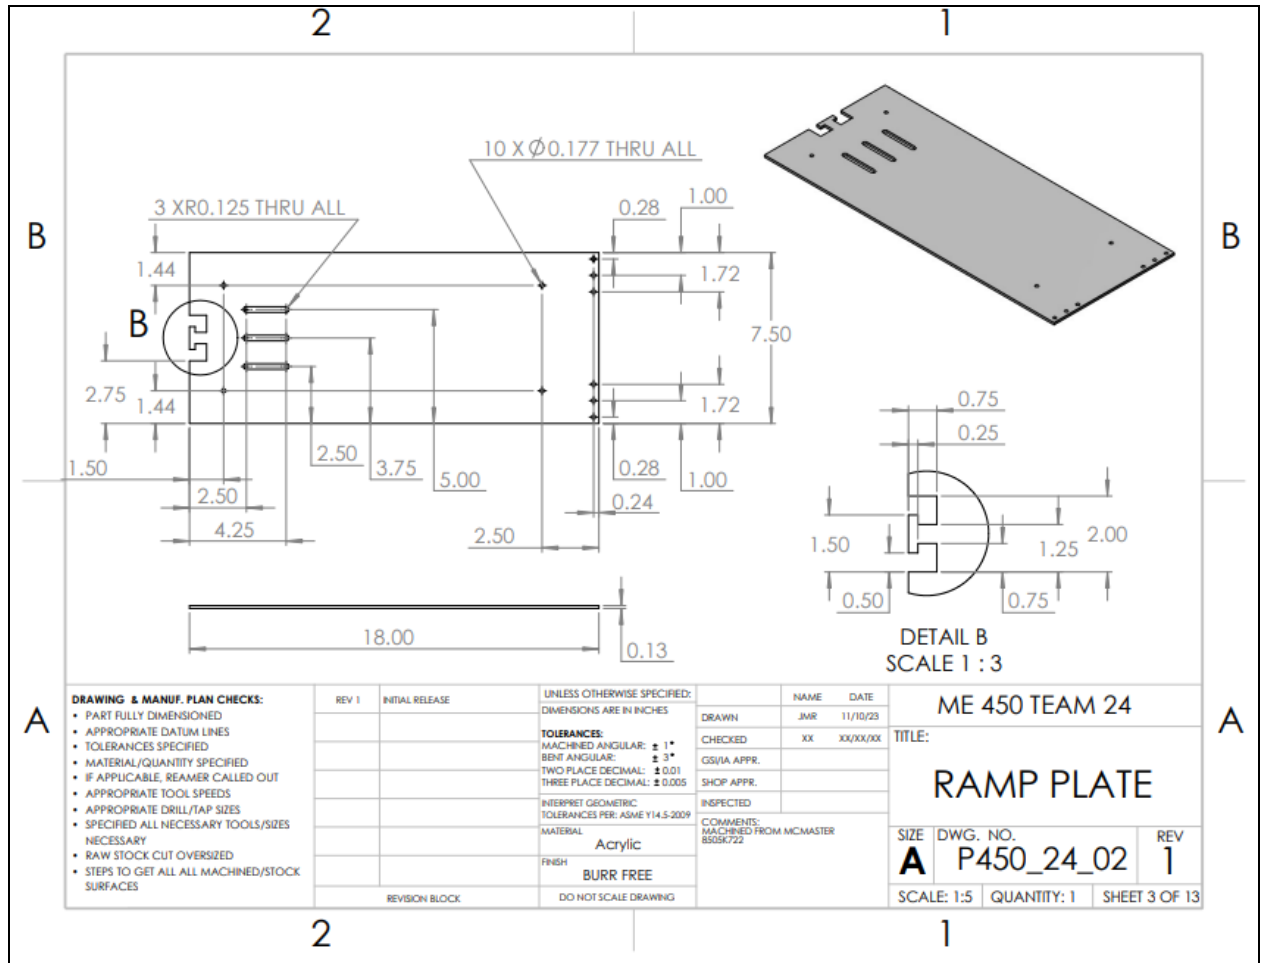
Manufacturing drawing for the ramp plate component of the beta design.
